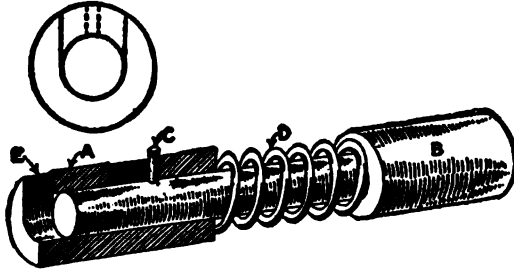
TOOL FOR REMOVING BURRS FROM JAM NUTS
